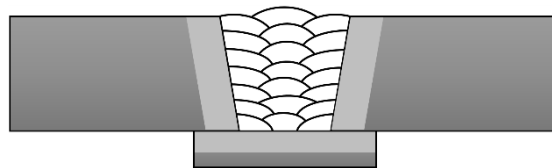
Schematic of an all-weld metal sample for the investigated type of welding consumables. The area shaded light grey is the buffer zone.
